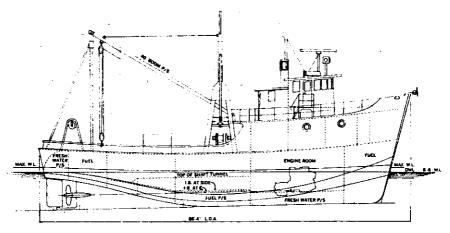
Dimensions of multi-purpose aluminum fishing vessel.
